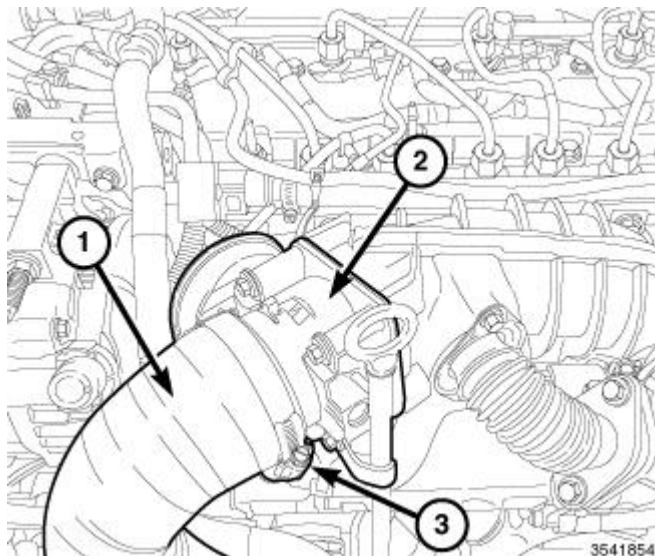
Charge Inlet Tube, EGR Air Control Valve & Clamp
